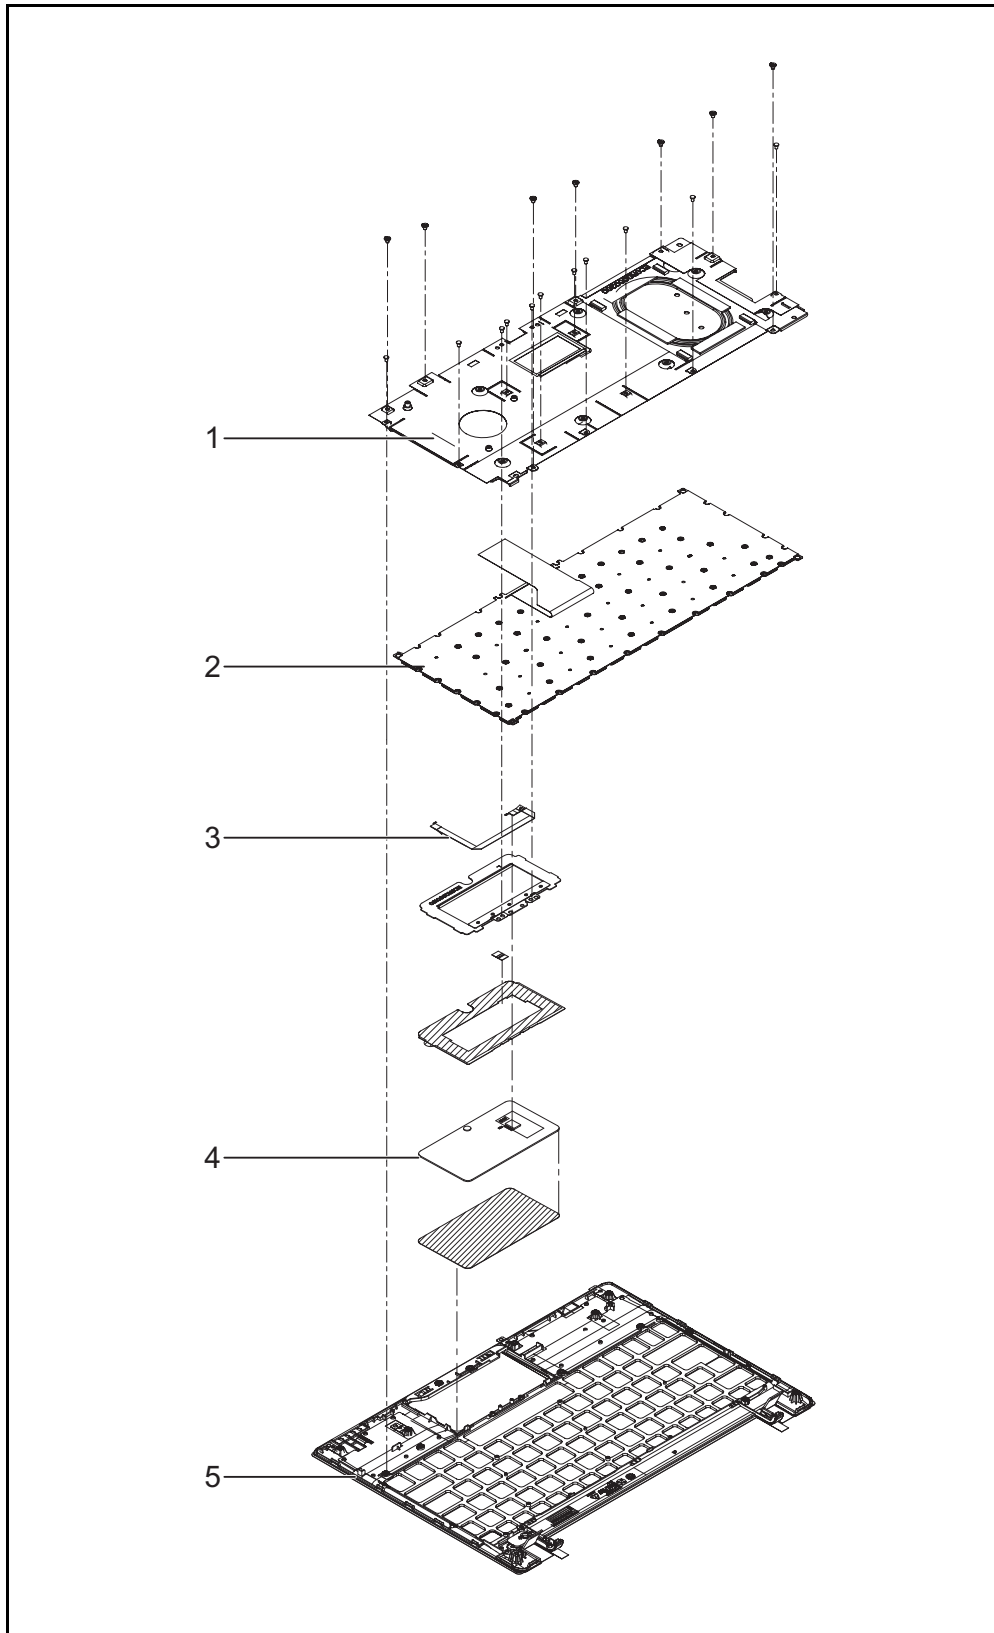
2. Lower Case Assembly Exploded Diagram
